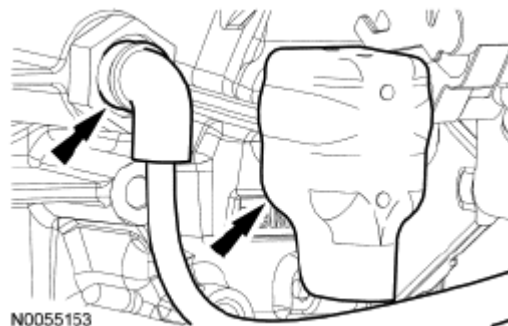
Locating Block Heater Electrical Connector & Heat Shield
